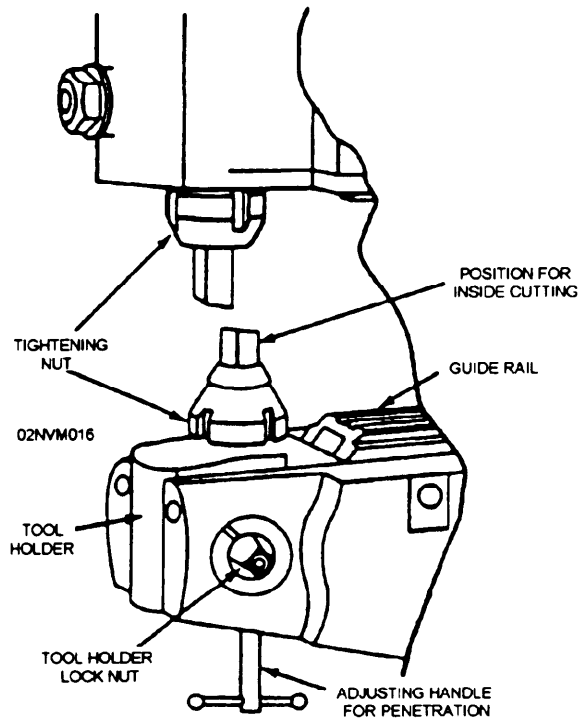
Pullmax universal machine, upper and lower cutting tools.
